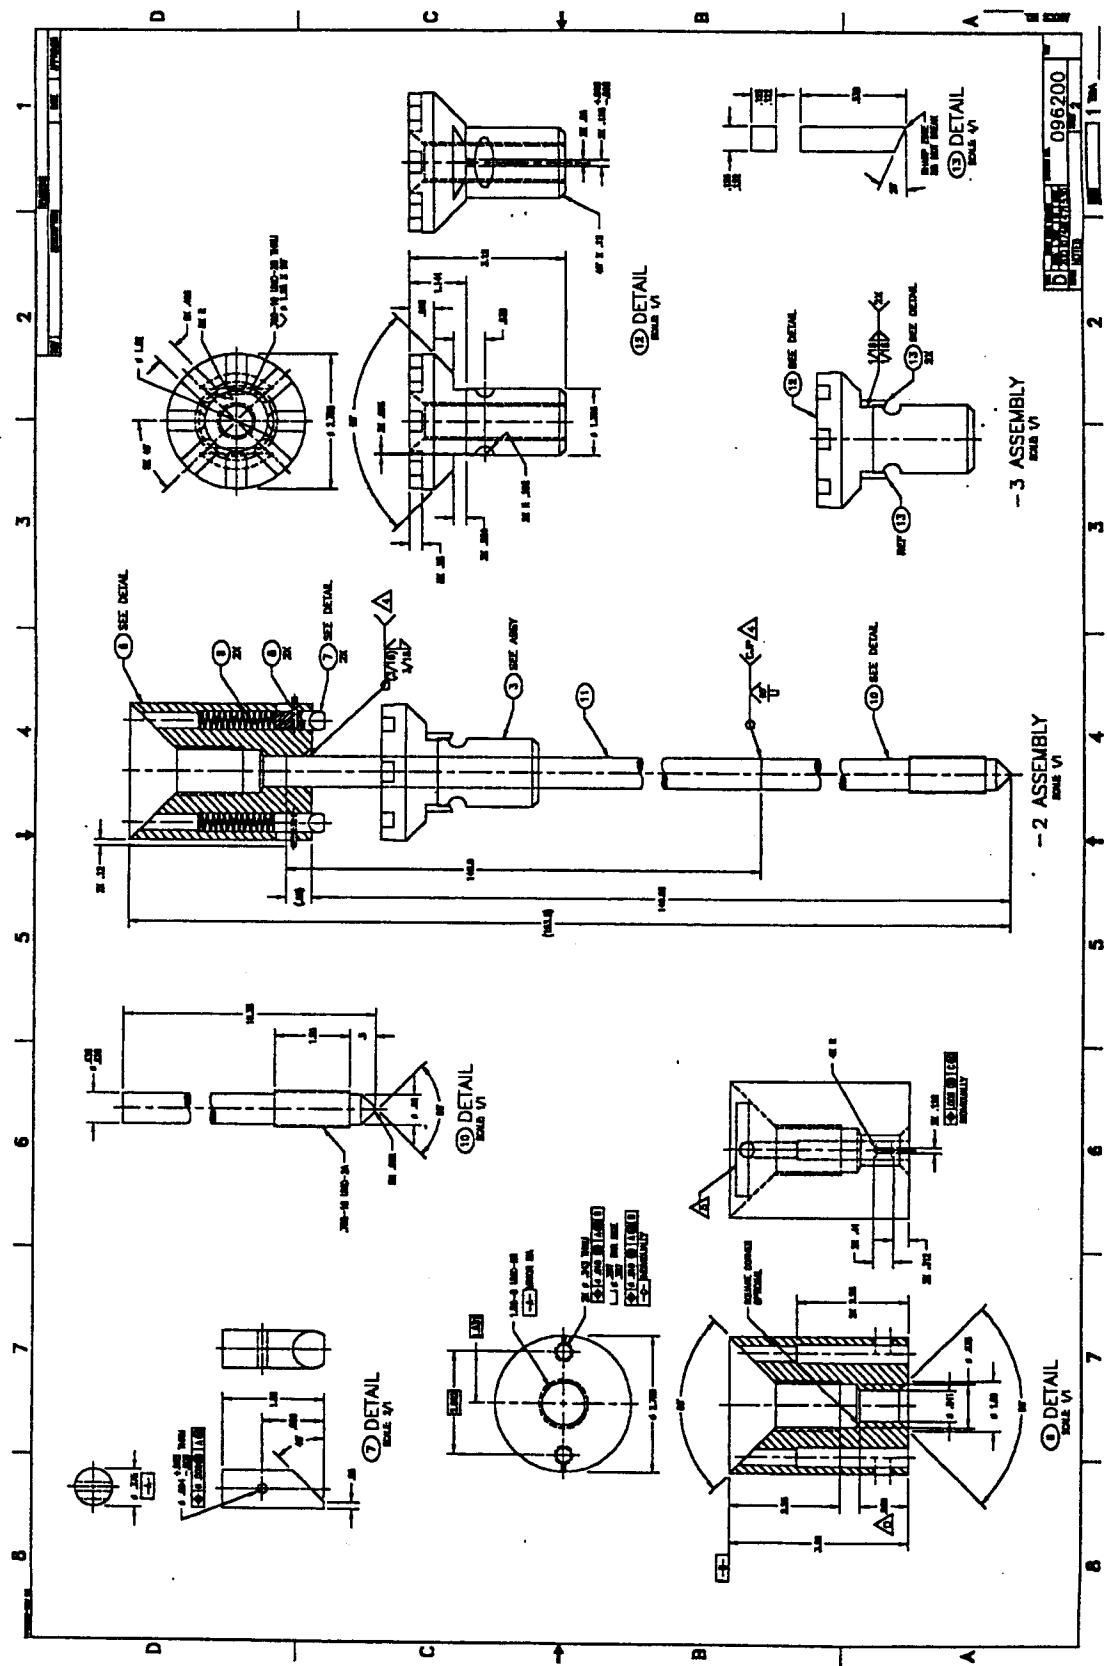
B. CPP-749 Peach Bottom Reactor Support Rod Assembly
